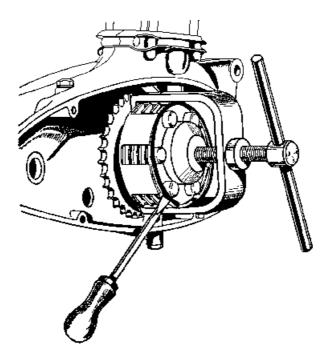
Removing the clutch plate circlip with Service Tool number 61-3191.
